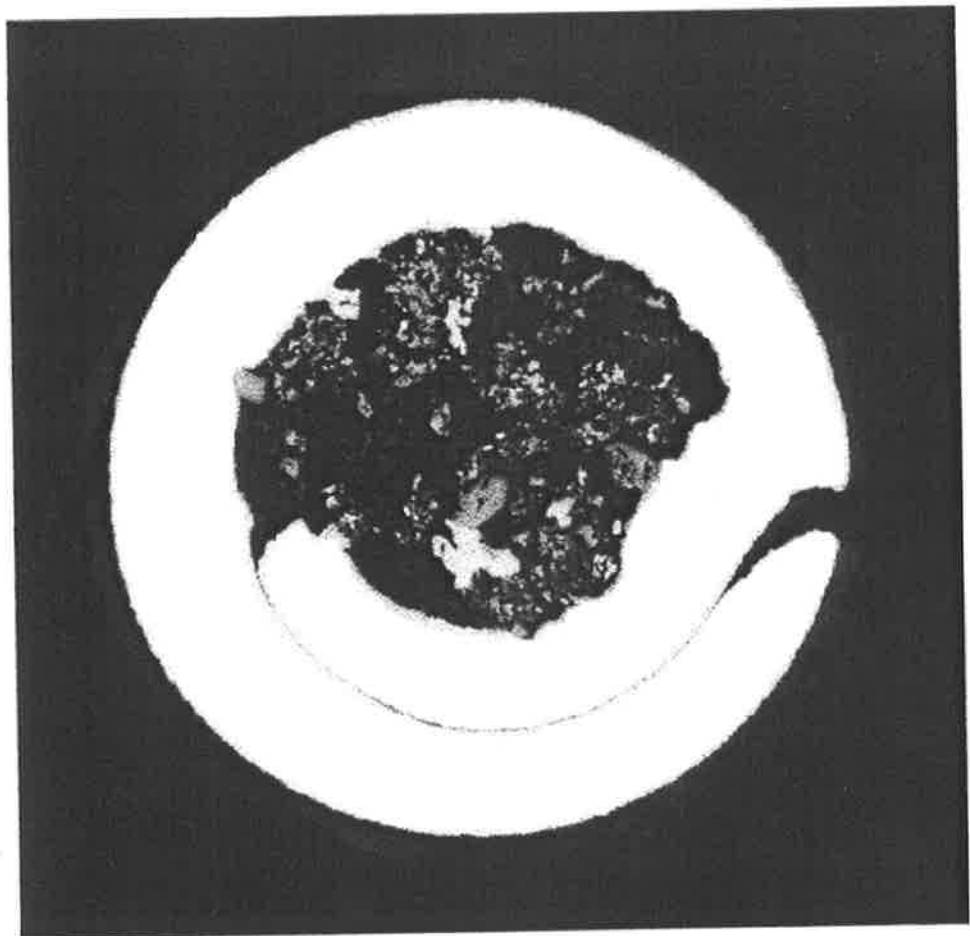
Cross-section of a metal-core welding wire produced using the CSIRO MST wire mill.
